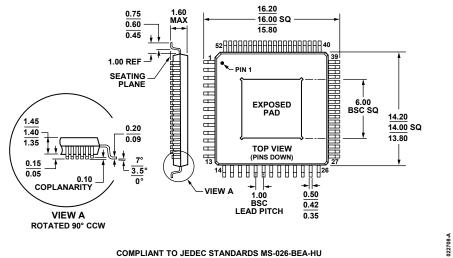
52-Lead Low Profile Quad Flat Package, Exposed Pad [LQFP\_EP] (SW-52-1) Dimensions shown in millimeters
